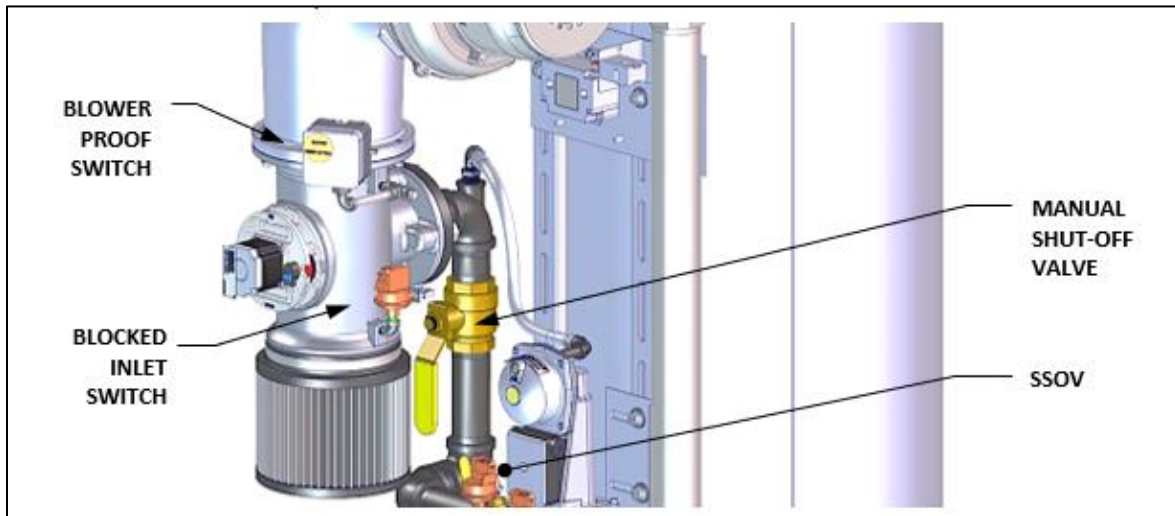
Blower Proof & Blocked Inlet Switch Locations
